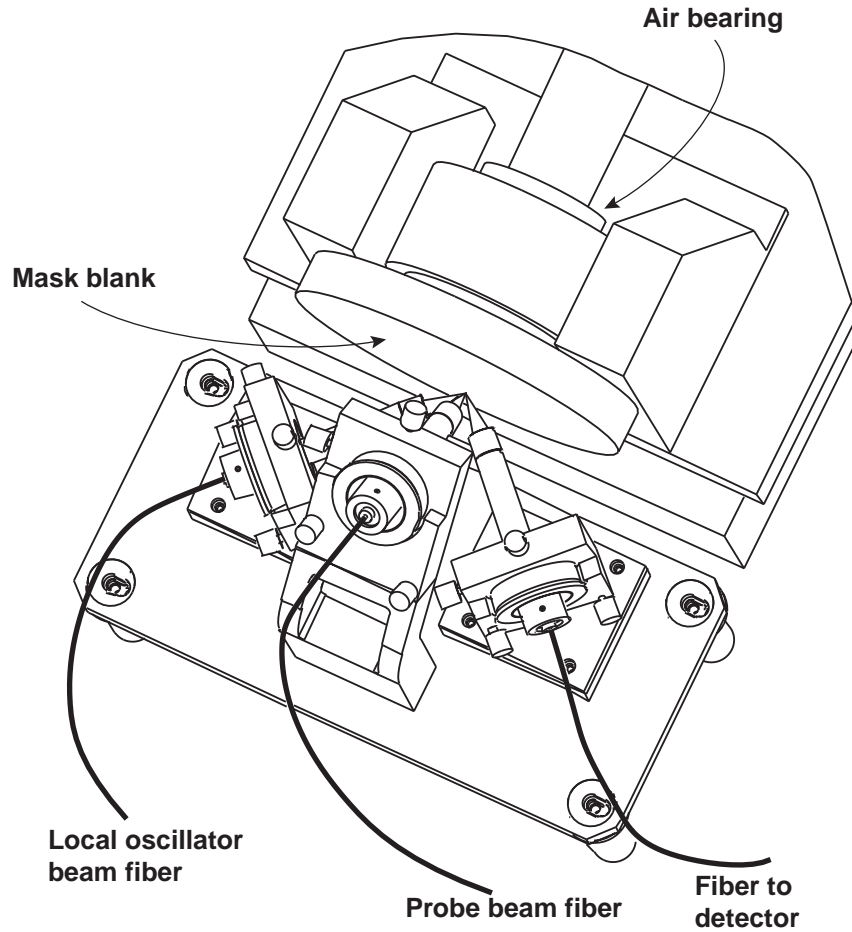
CAD drawing of assembled optics and wafer translation/rotation stage.
